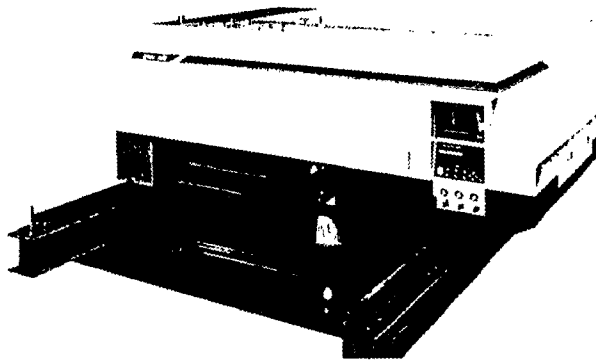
Outlook of Oscillator Built-In Cutting Machine
